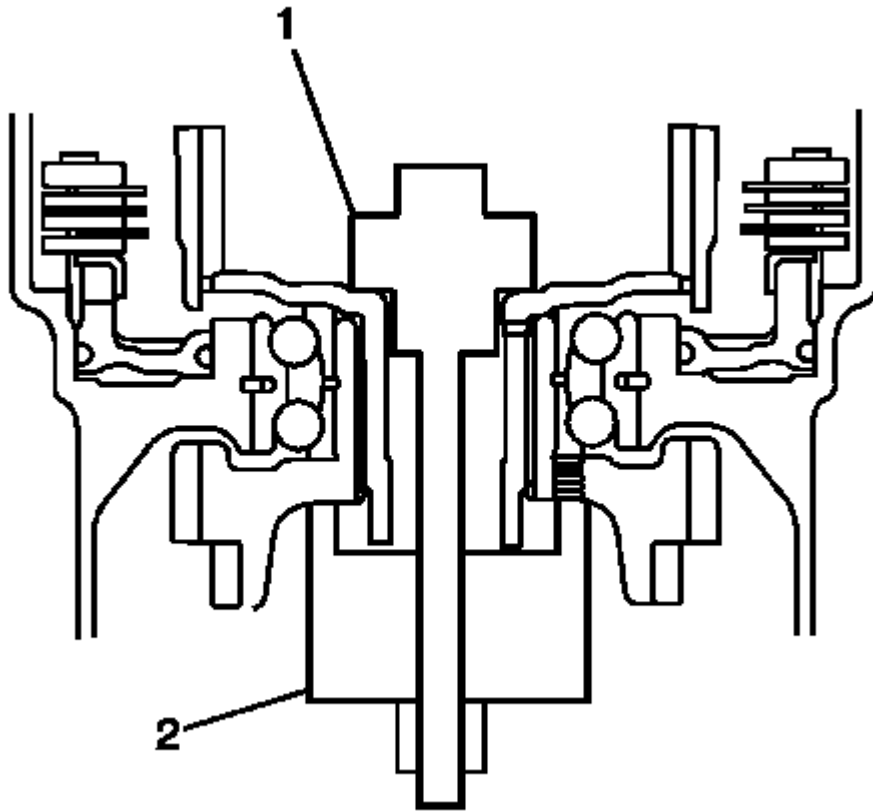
DT 46460, DT 46455 & Planetary Ring Gear
